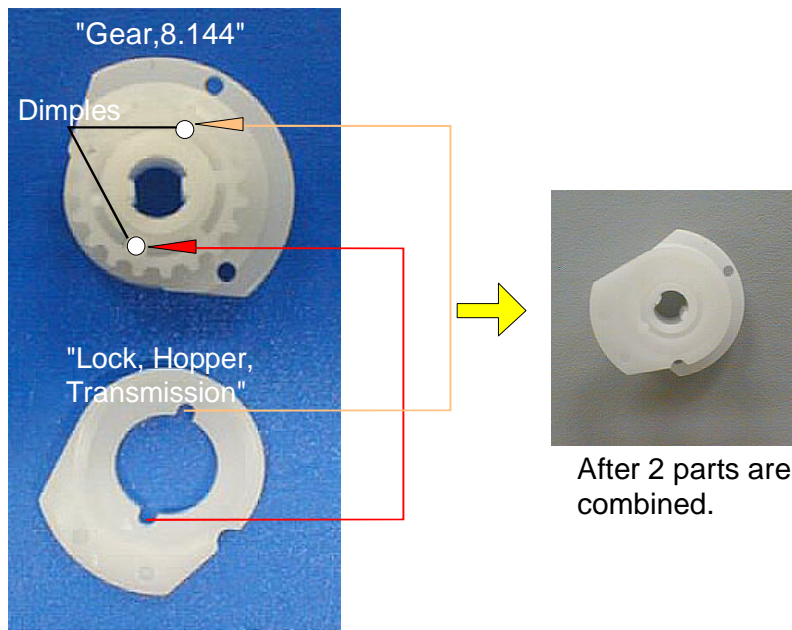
Combining "Hopper Lock Transmission Gear Assembly"
